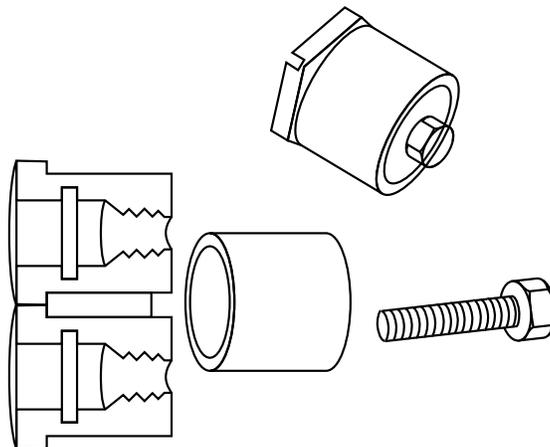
Assembling Inner Half of Tool Around Armature Shaft and Retaining Ring.
